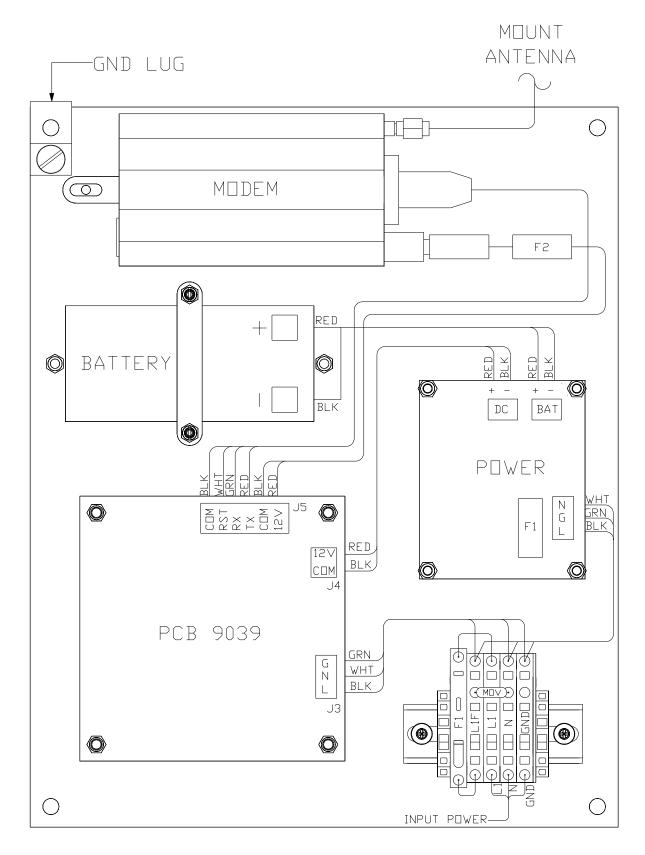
FTW 174 Internal Wiring & Component Layout
